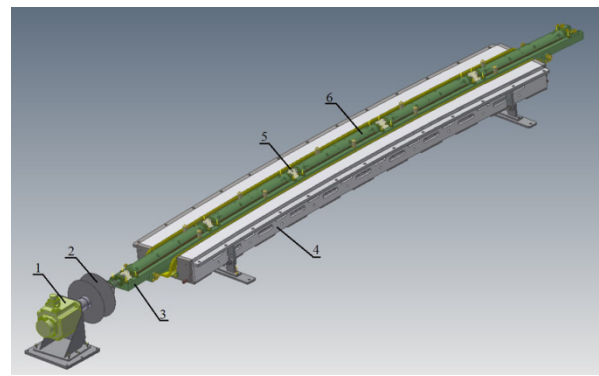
Layout of bottom part of magnets yoke with installed MMS: 1. Servomotor, 2. Bobbin for cable, 3. Base of frame, 4. Bottom part of yoke, 5. Flexible coupling, 6. Measuring section.
